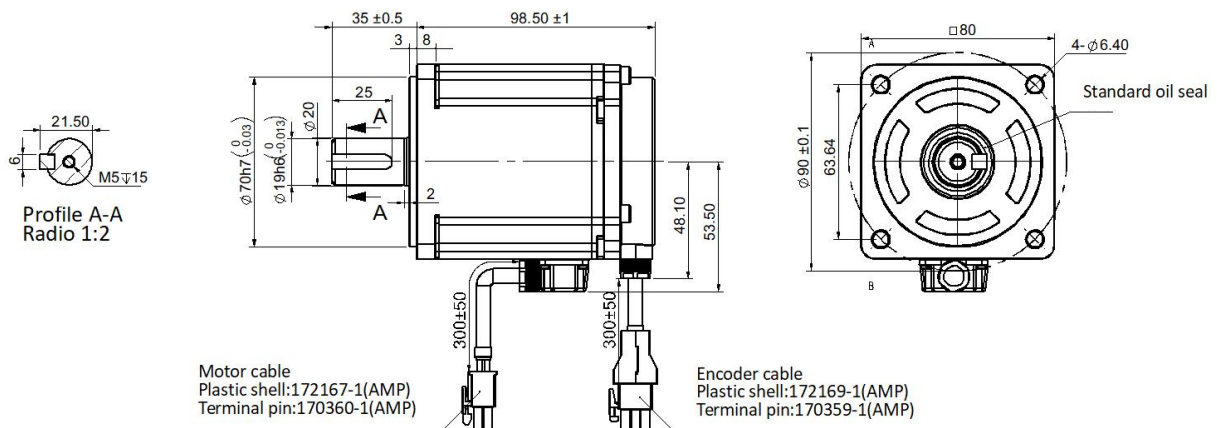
Installation dimension drawing of WD series 80 flange servo motor
